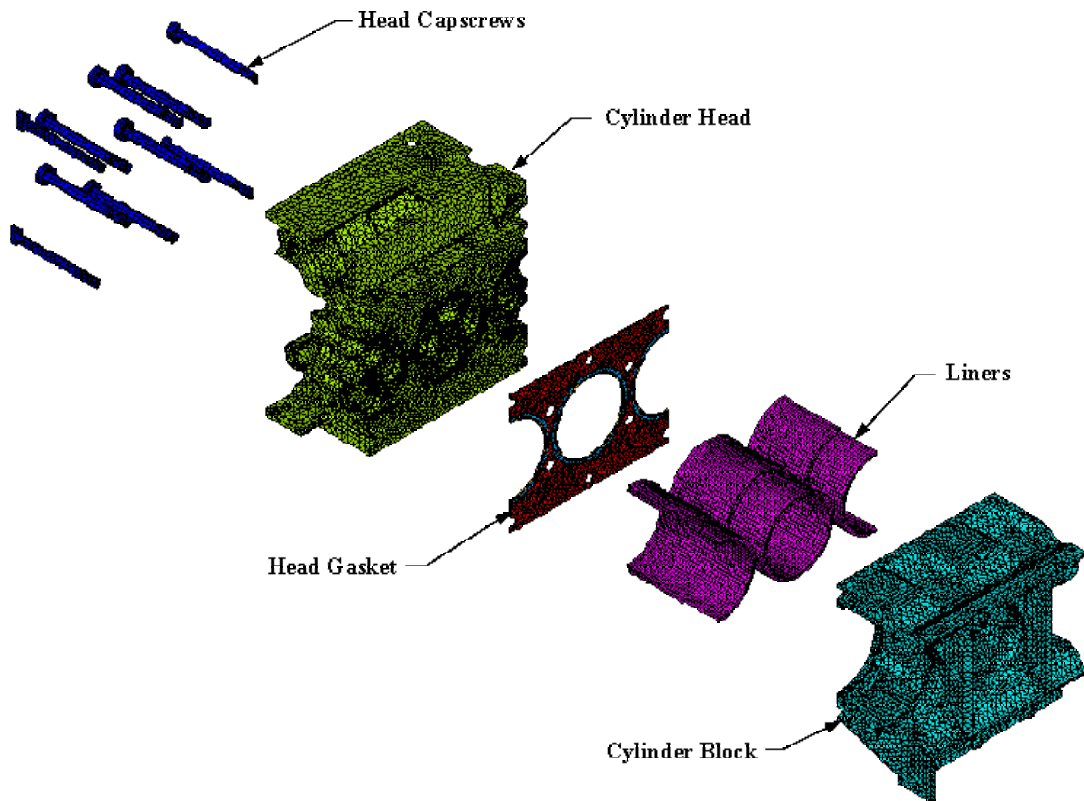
Exploded View of ISX Cylinder Head Gasket Joint Model
